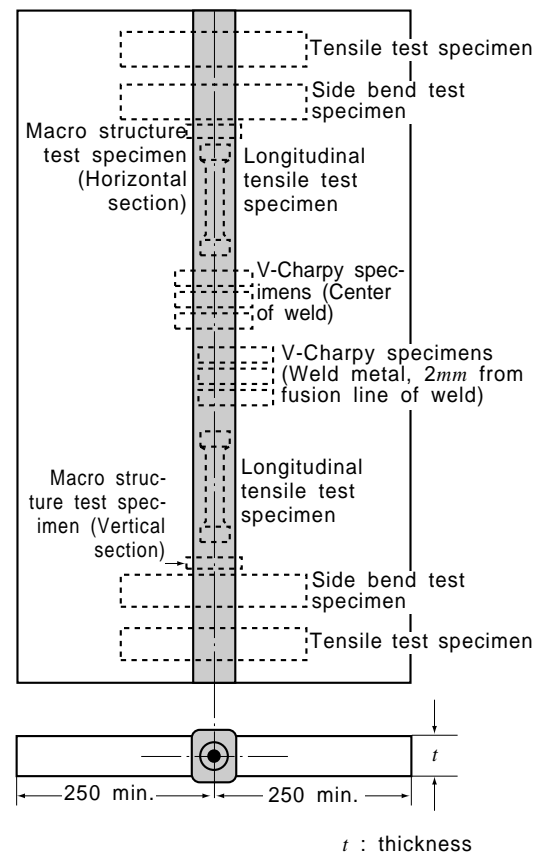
Butt Weld Assembly (Electro-slag and electro-gas welding, Unit :mm)
